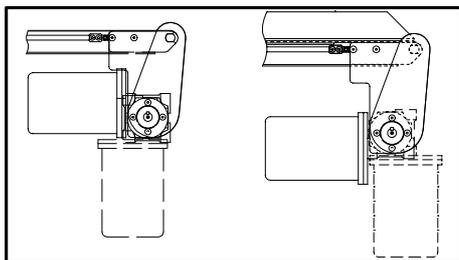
Gearmotor Re-orientation Details for Flat Belt Conveyor (left) & Cleated Belt Conveyor (right)
